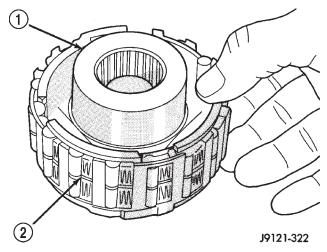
Assembling Overrunning Clutch And Hub 1 – CLUTCH HUB 2 – OVERRUNNING CLUTCH
